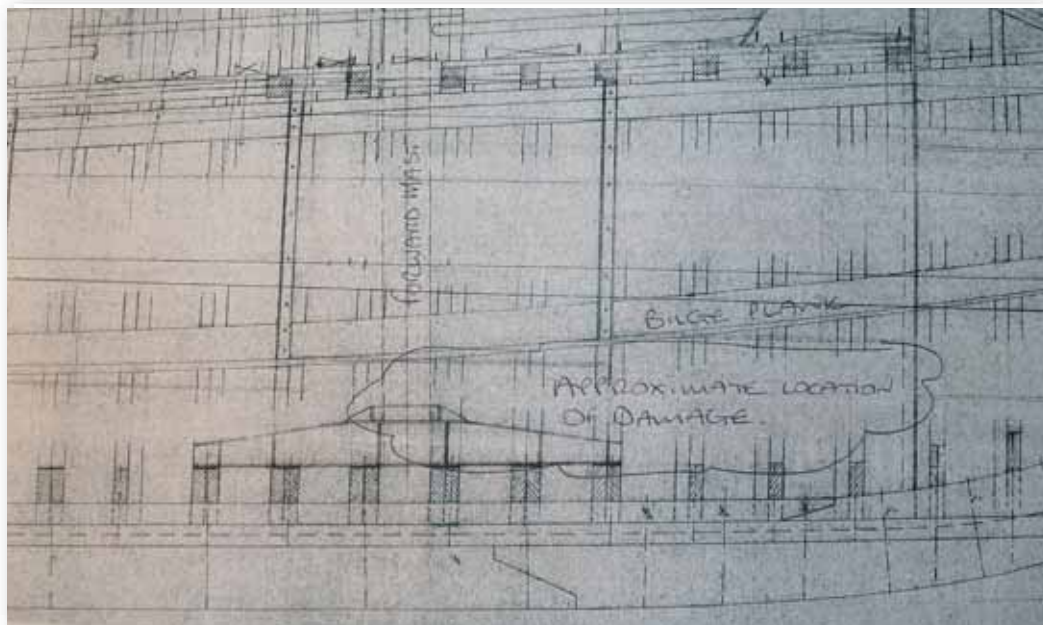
Construction Profile in way of foremast (location of three partial bulkheads are shown)
